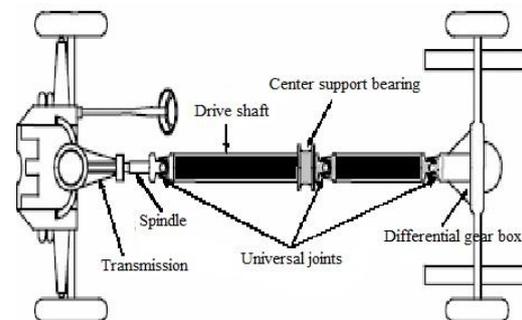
CONVENTIONAL TWO-PIECE DRIVE SHAFT ARRANGEMENTS [4]
